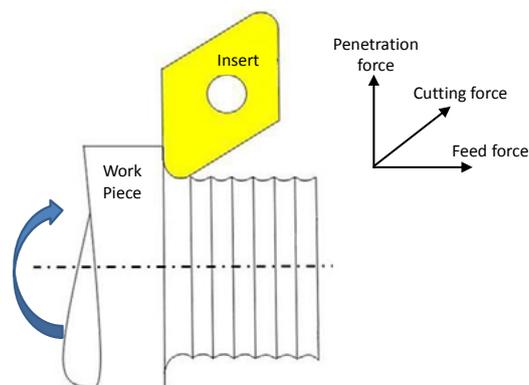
Position of the cutting tool before removing the excess of bead under finish turning conditions
